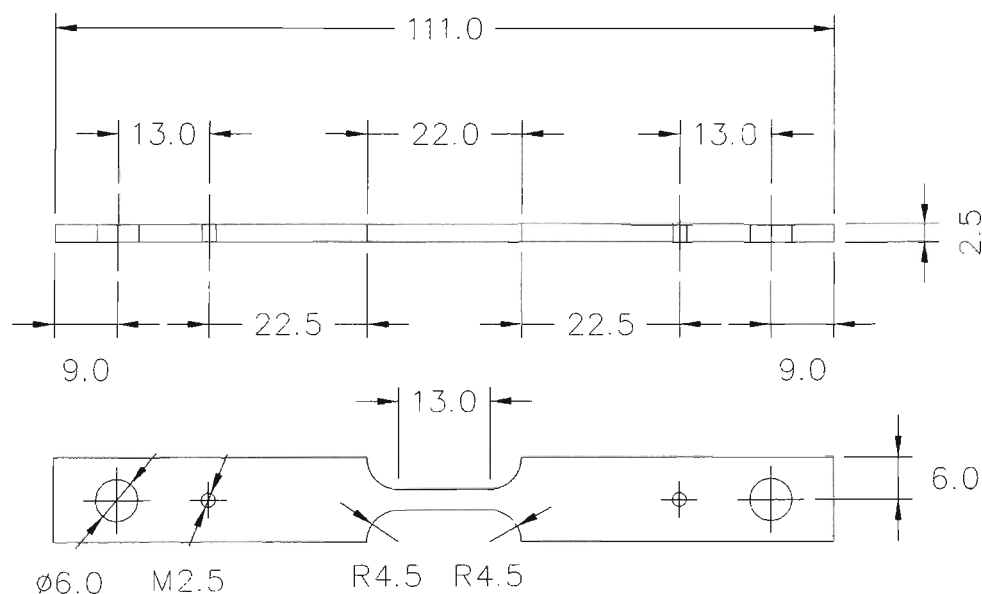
Technical dimensioned drawing of a LIST sample.
